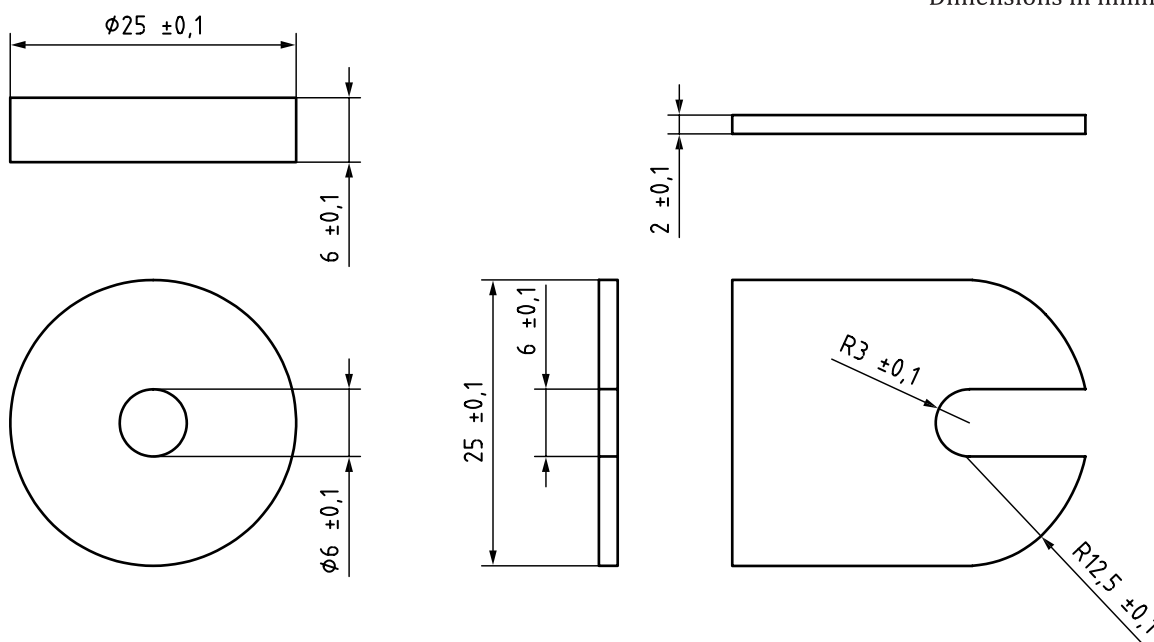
Spacer No. 1 (left) and Spacer No. 2 (right)
